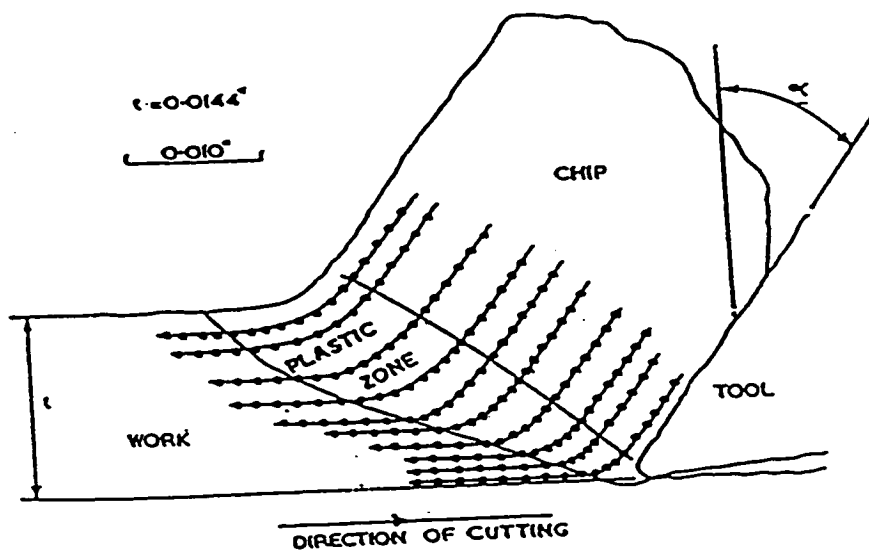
The Mathews, Hastings and Oxley shear zone model in metal cutting [69]
